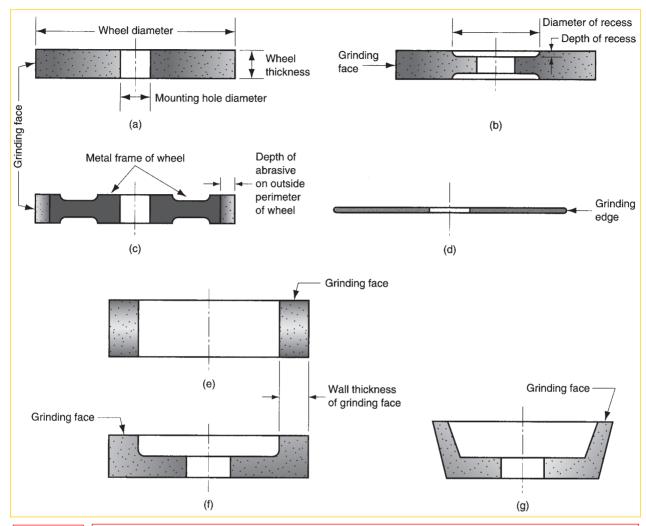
Some standard grinding wheel shapes: (a) straight, (b) recessed two sides, (c) metal wheel frame with abrasive bonded to outside circumference, (d) abrasive cutoff wheel, (e) cylinder wheel, (f) straight cup wheel, and (g) flaring cup wheel.
